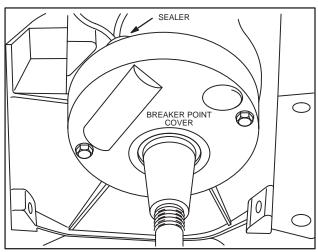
INSTALLING AND SEALING BREAKER COVER (TYPICAL)
